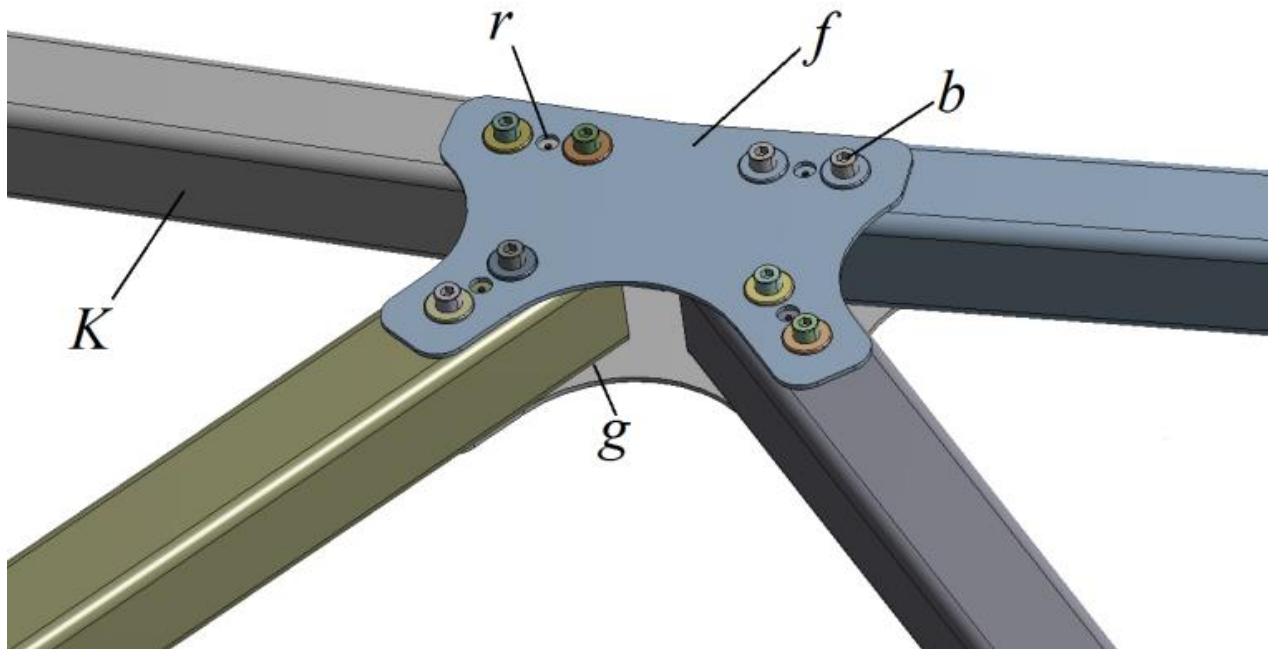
Typical joint assembly for skeleton beam elements: K – beam element, f – fitting; b – bolted connection, r – rivet, g – glue junction of fitting and beam
